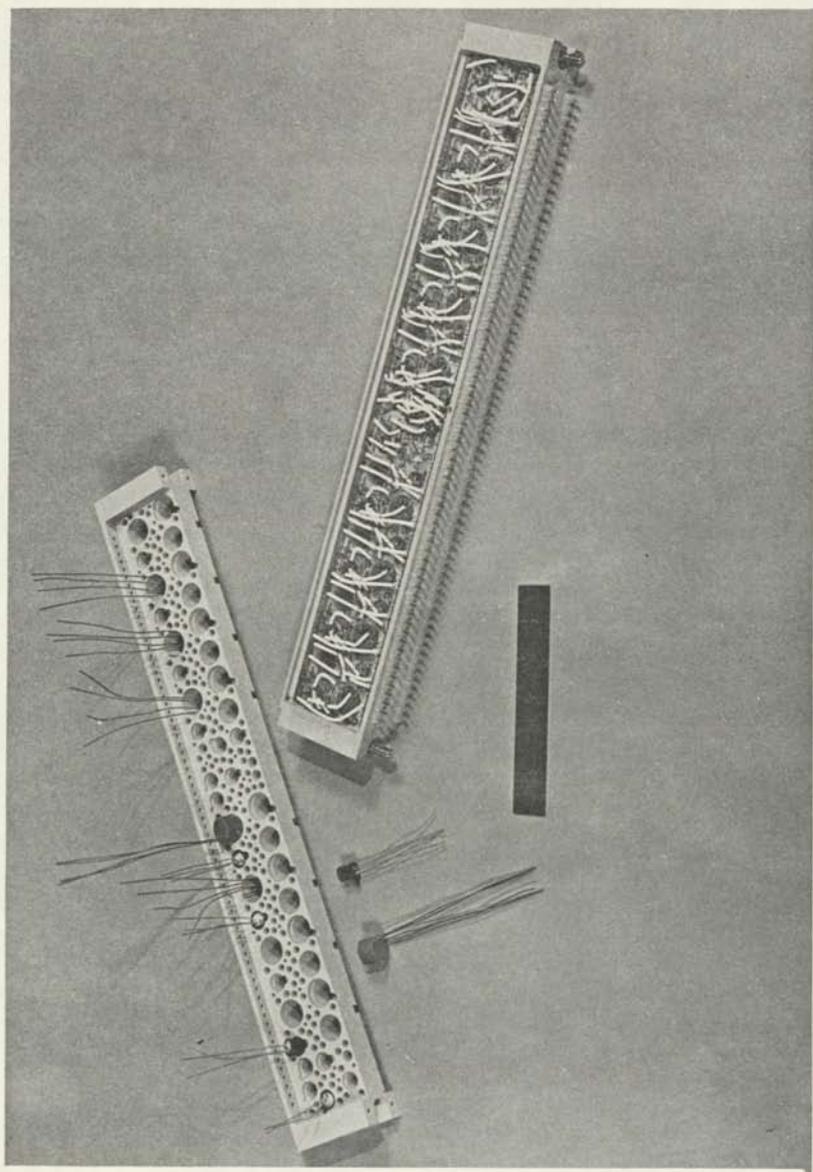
Typical Welded Cordwood Construction
